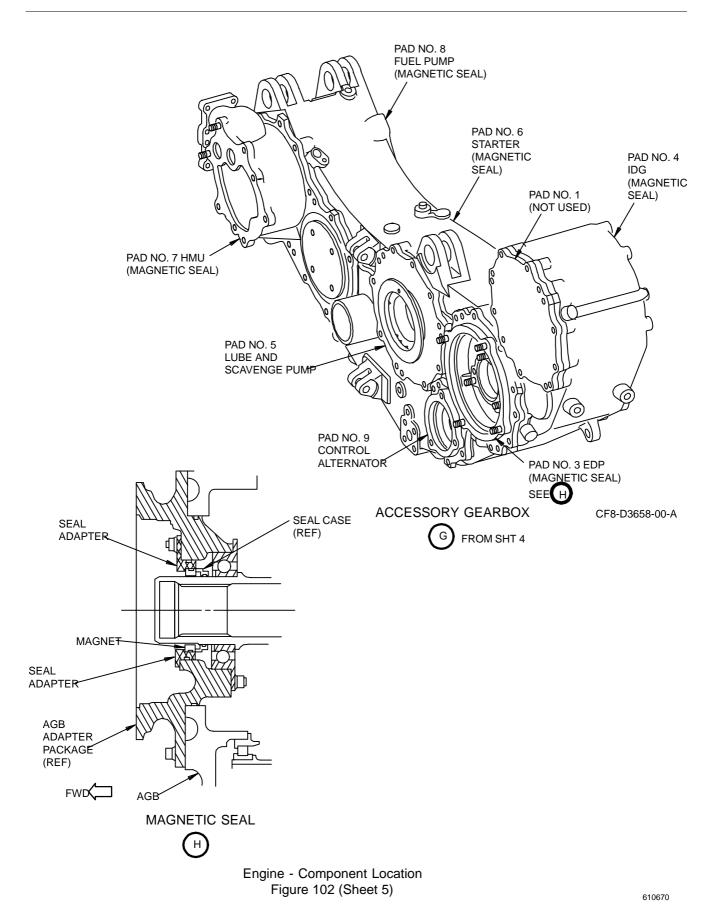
72-00 Engine Component Location Fig. 102 (Sheet 5)
